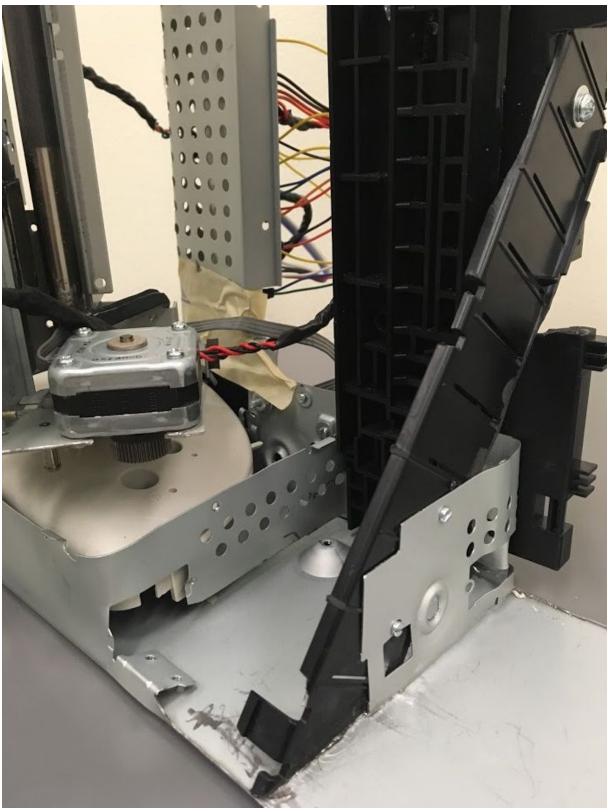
Detail of repurposed printer case-parts. Sheet metal was cut, bent, and fastened to support a vertical print carriage.
